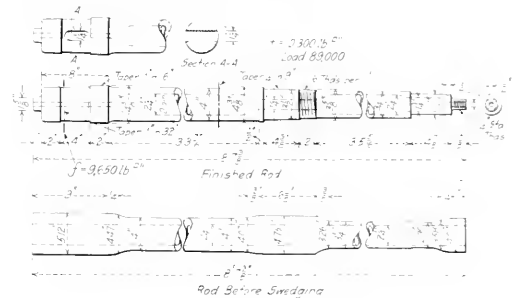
Piston Rod of Pennsylvania Atlantic Type Locomotive
